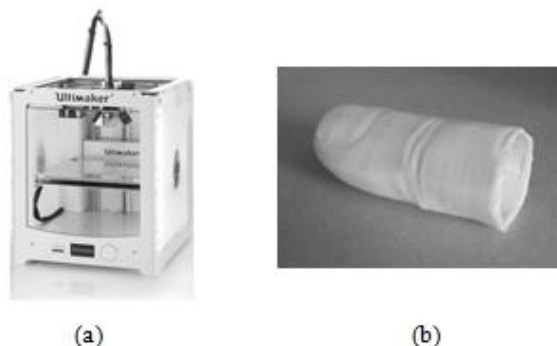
The 3D printer used in forefinger fabrication (a) and the final product (b)
